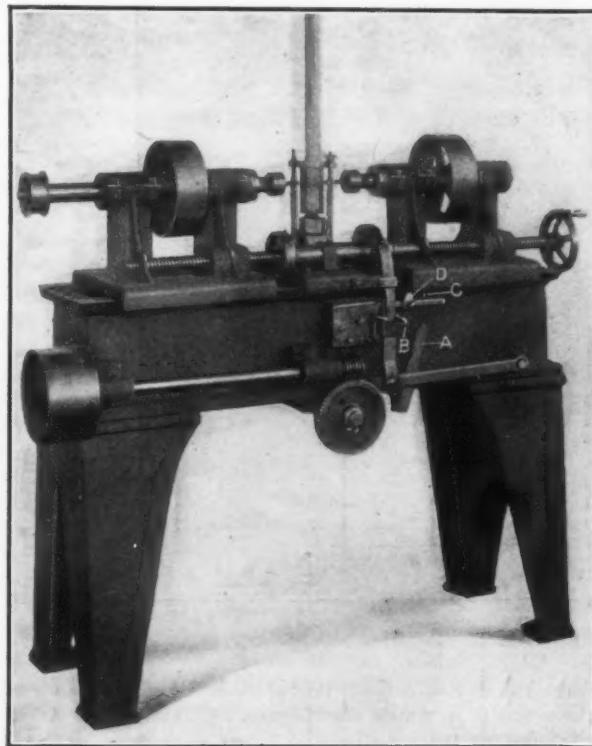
A Machine for Splining Drill Press Spindles. Built and Used by the Hoefer Mfg. Company, Freeport, Ill.
